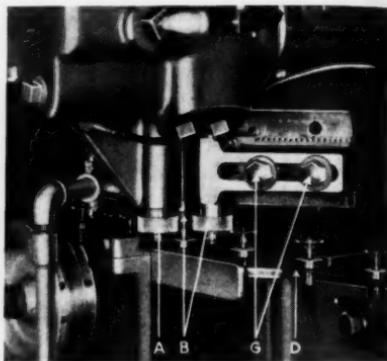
Close-up view of the Burnishing Rolls, With Gear in Position.
